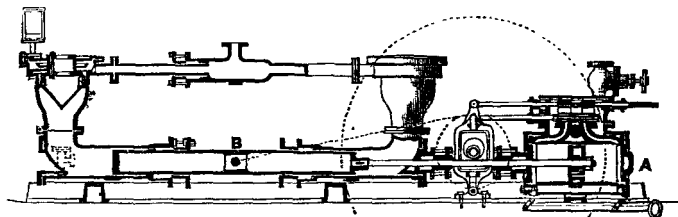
shows a compressor designed and made by the HUMBOLDT COMPANY near Cologne. The apparatus consists of a steam cylinder, steam, and variable expansion steam valves, a double-acting plunger with two side rods coupled to two fly-wheels, two valve boxes, one at each end of plunger case fitted with inlet and outlet valves. Water introduced into each plunger case serves the threefold purpose of filling the clearance spaces, expelling the air, and absorbing the heat given off during the compressing operation. The following are particulars of a machine erected at the Saarbrück Collieries. The motor is a horizontal expansion steam-engine—cylinder  $24\frac{1}{2}$  in. diameter, stroke 43 in., with a pressure of 30 lb. of steam, and a cut-off at half-stroke; at 25 revolutions per minute 54 horse-power is developed. The compressor plunger is  $15\frac{1}{2}$  in. diameter and 12 ft. long. Each plunger case is 5 ft. long and 20 in. diameter; the branch at the end of each case is 33 in. diameter and 5 in. in height, upon which is placed a valve chest of enlarged diameter. The stuffing boxes of each case are distant 6 ft. from each other. In this space a cross-head at tached to the middle part of the plunger and travelling in guides is connected to side rods attached to fly-wheels. With an air pressure in the receiver varying from 30 to 45 lb. per square inch, the useful quantity of air compressed is stated to equal 96 per cent. of the theoretical contents of the stroke. The following are the dimensions of some of the compressors constructed by the HUMBOLDT COMPANY:—
